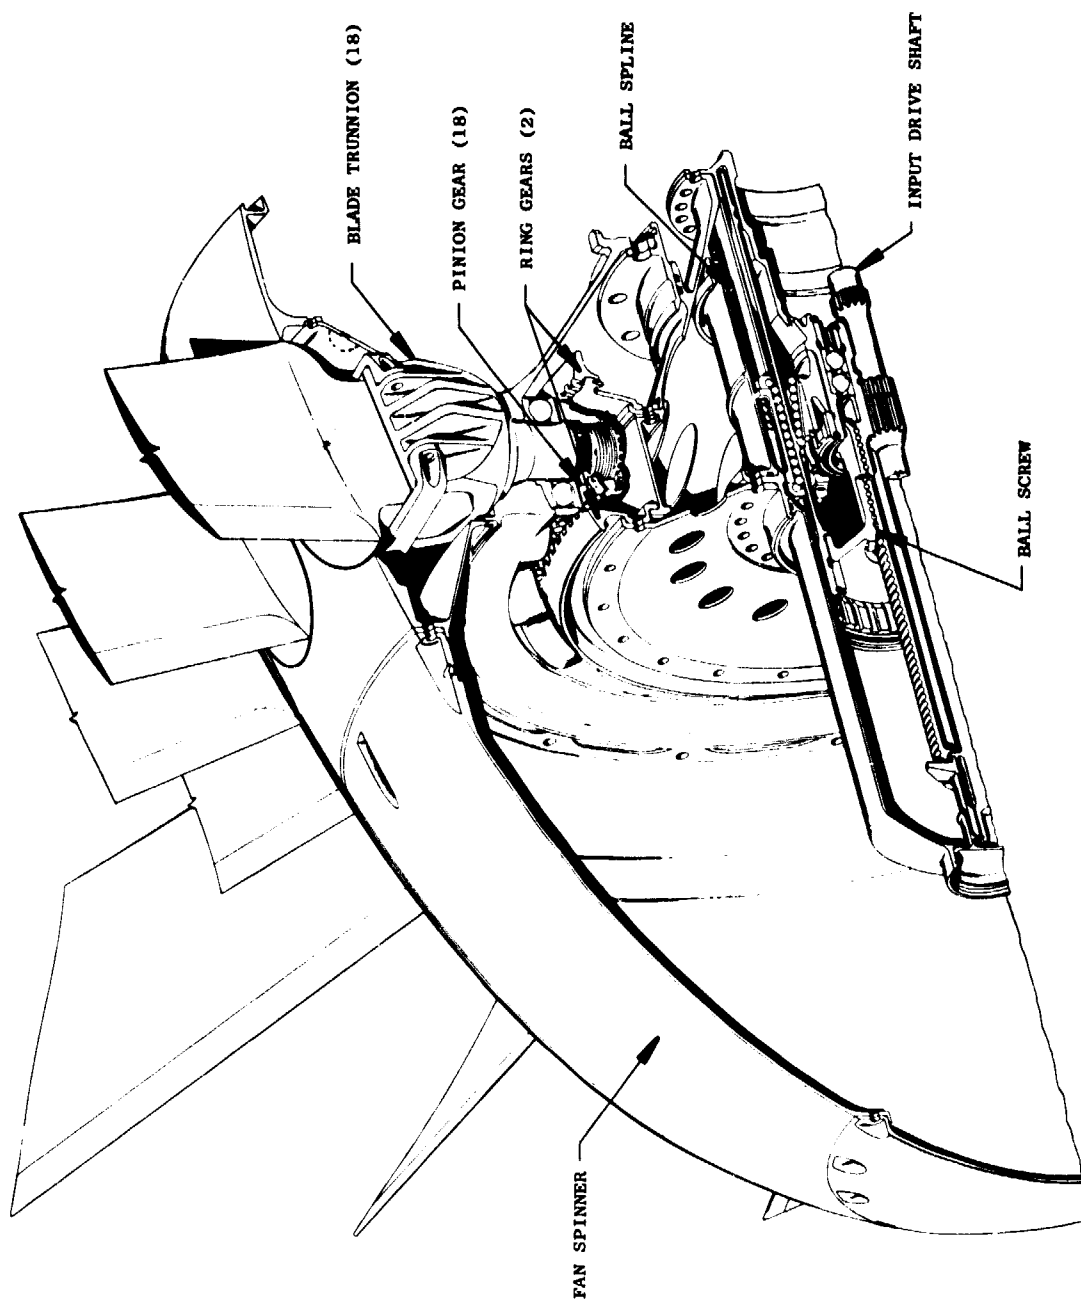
GE Ball Spline Actuator System, (Trimetric).
